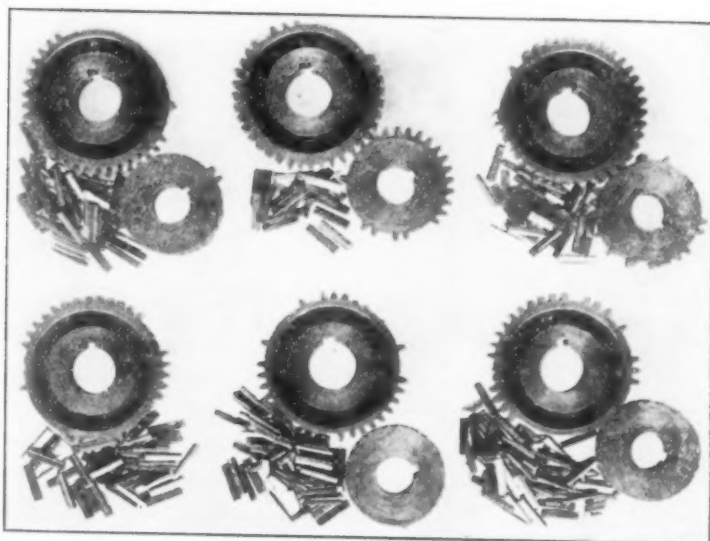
30 TOOTH ENGAGING 40 TOOTH, TESTS 24—26, 32—34 INCLUSIVE,
